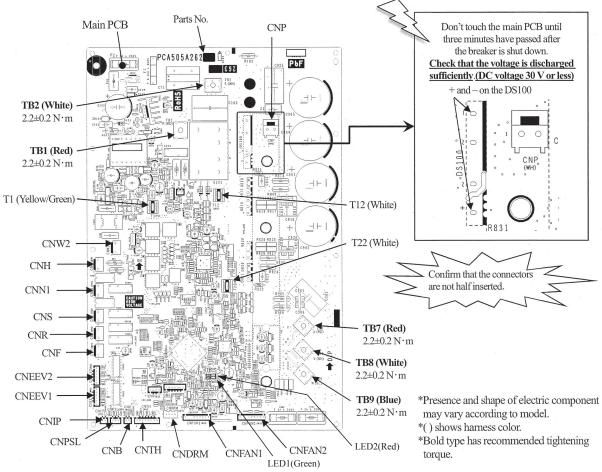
Parts arrangement view of main PCB and voltage measurement points
